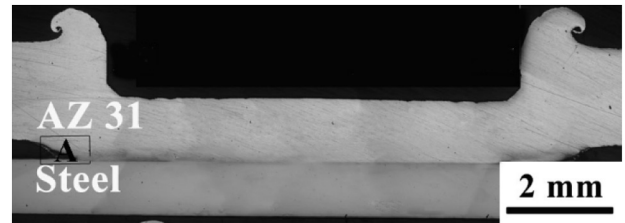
Typical cross-section photograph of FSSW Mg–steel joint.
